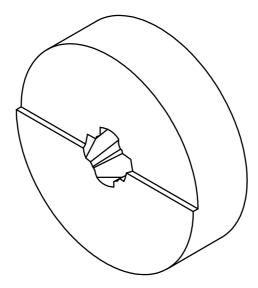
Inspection gauge for form PZ tips, perspective view
